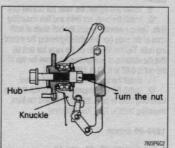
Use of press tool for hub removal-Mirage and Diamante
